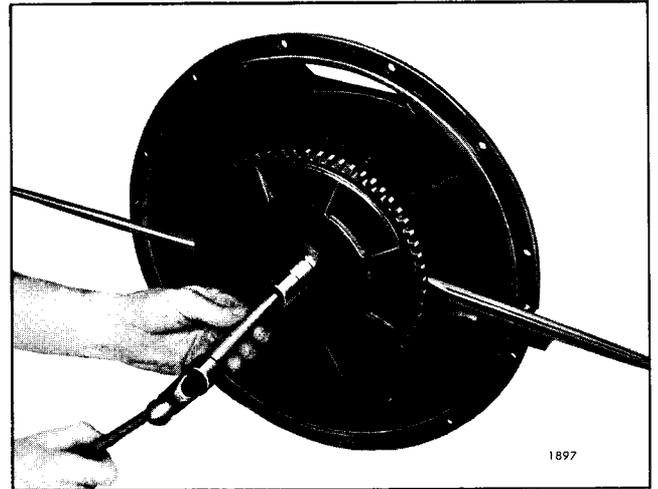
Removing Clutch Assembly from Clutch Drive Shaft
